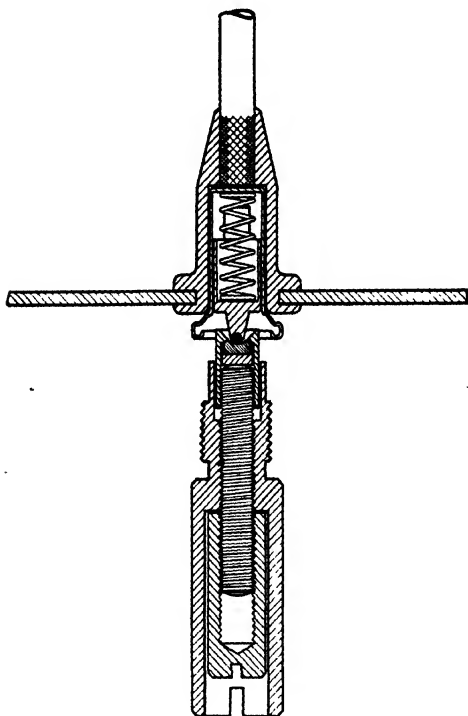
Bottom pivot and jewel in Siemens single-phase meter.
